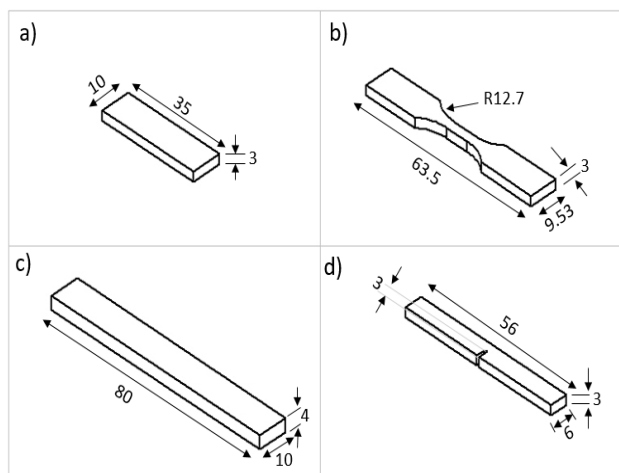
Three dimensional models of test specimens: (a) dynamic mechanical analysis, (b) tensile, (c) flexural, and (d) single-edge-notch for the three-point bend (mode I fracture toughness, K_{IC}). All dimensions are in mm.
